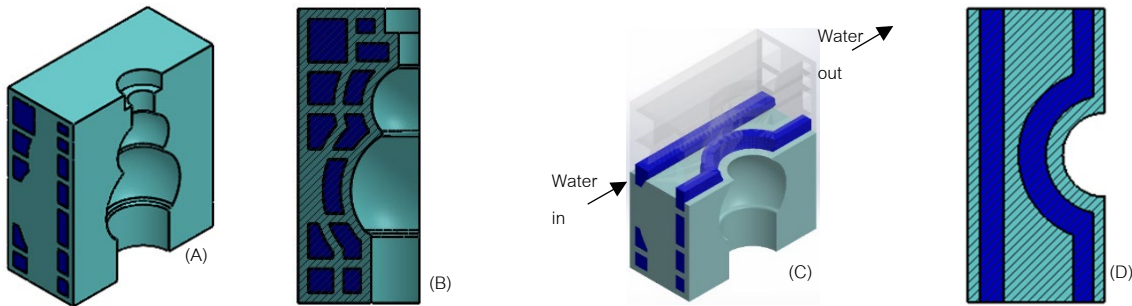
Model 3: Isometric view (A); Section view (B); Section view with transparent (C); Section view - top (D)
